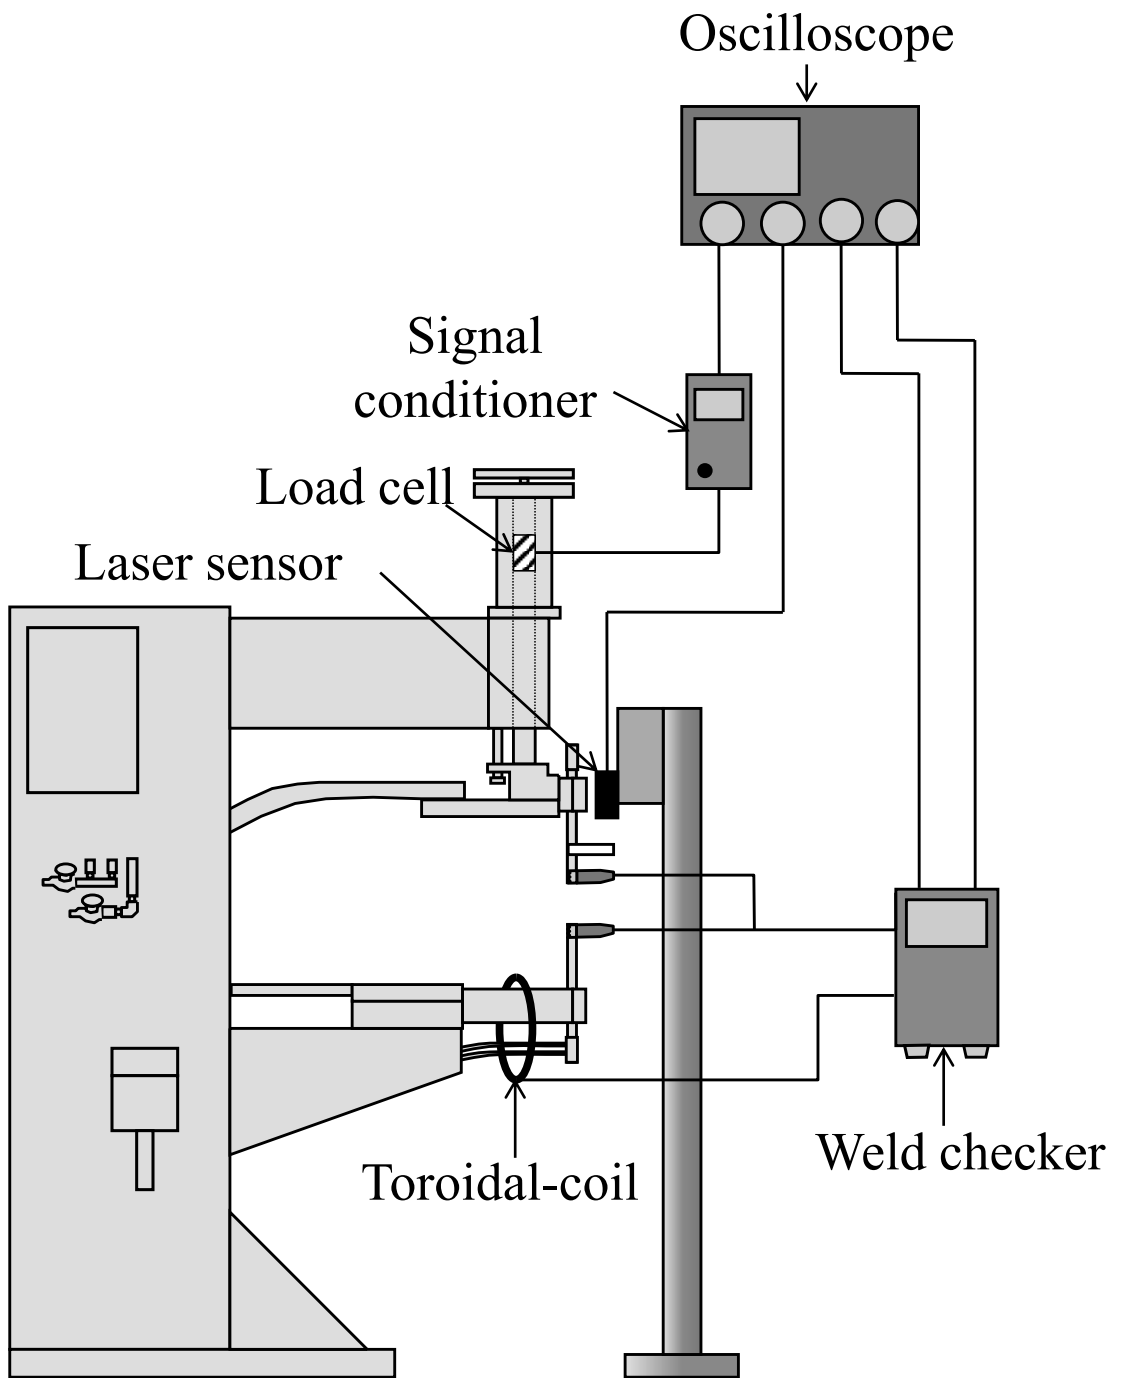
Schematic diagram of resistance welding machine after modification
